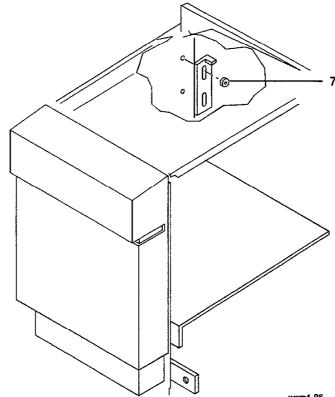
Removing the HCF Paper Tray Snubbers
